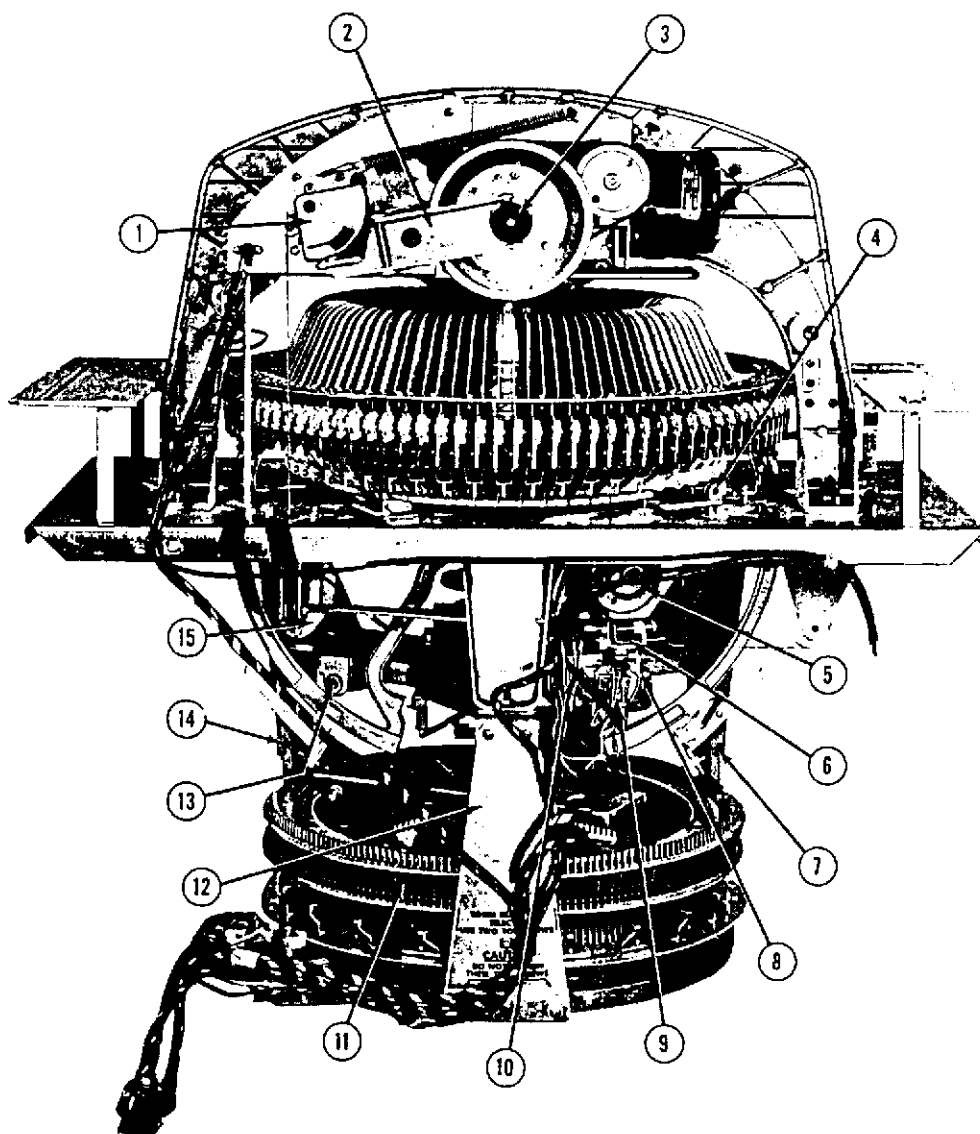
MODEL 2100 RECORD CHANGER (REAR VIEW)
